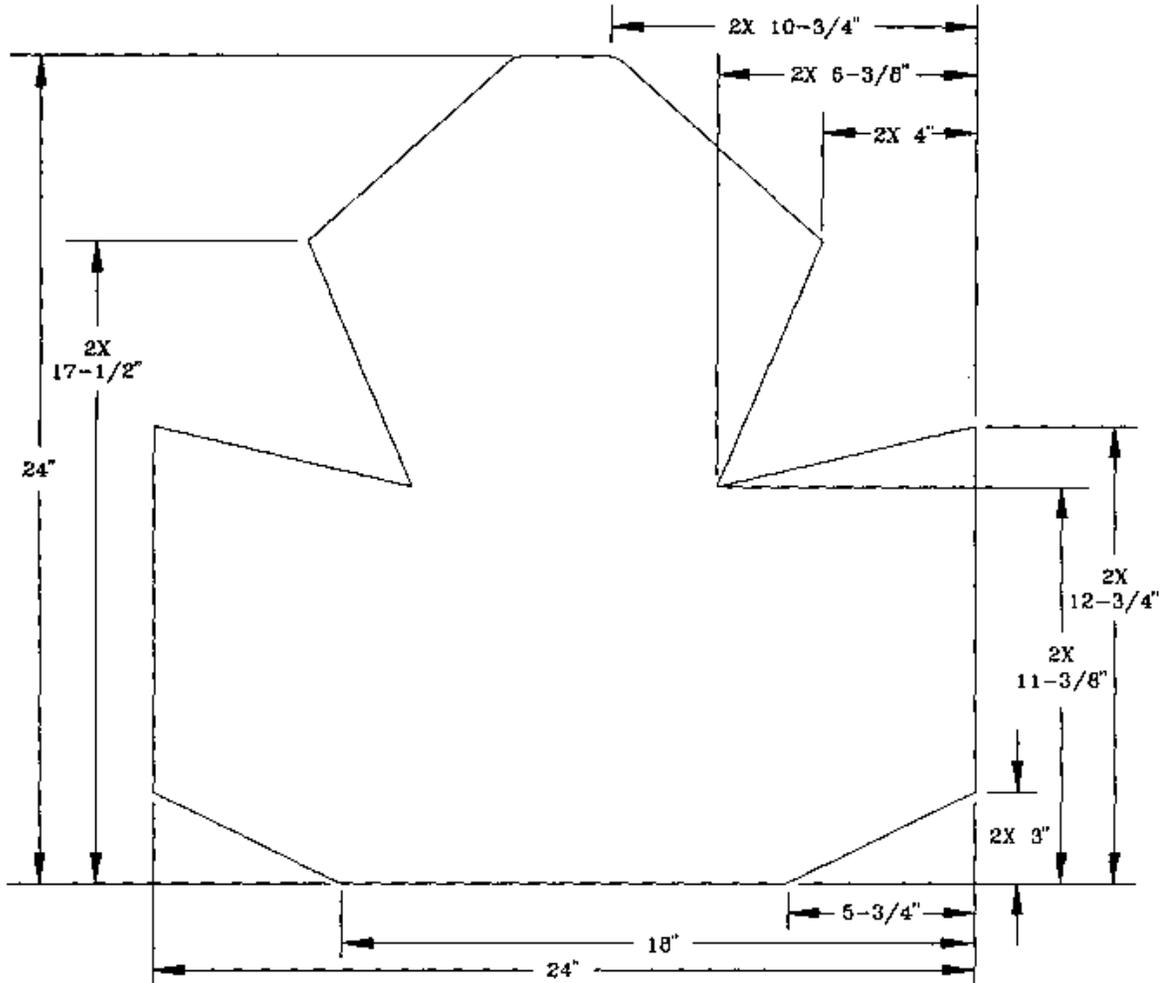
(CONTAINER SIDE MOUNTED) LOWER CAP ASSEMBLY (SHEET 1 OF 2)
